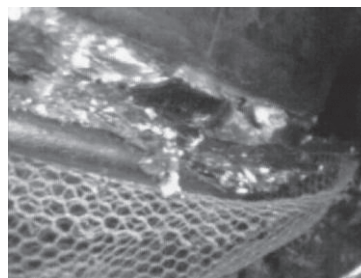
The crushed N_2 bore tube viewed from the vacuum space inspected by a videoscope.
